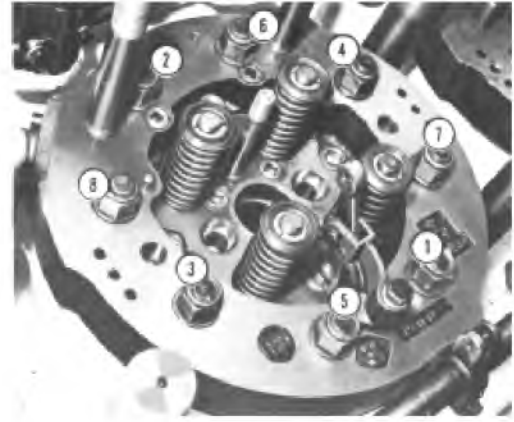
Head-To-Liner Nut Tightening Sequence
